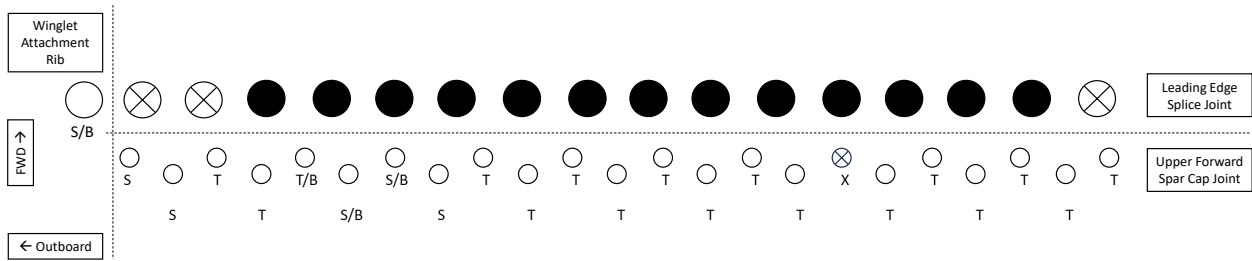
Schematic of the upper leading edge splice joint and upper skin-to-forward spar fastener conditions along the wing extension. Fractured fasteners are identified by an open circle, missing fasteners by a circle with an "X" and intact fasteners by a filled circle. Fracture designations are T = tensile fracture mode, S = shear fracture mode, B = mixed mode bending fracture used in conjunction with T or S as applicable.
